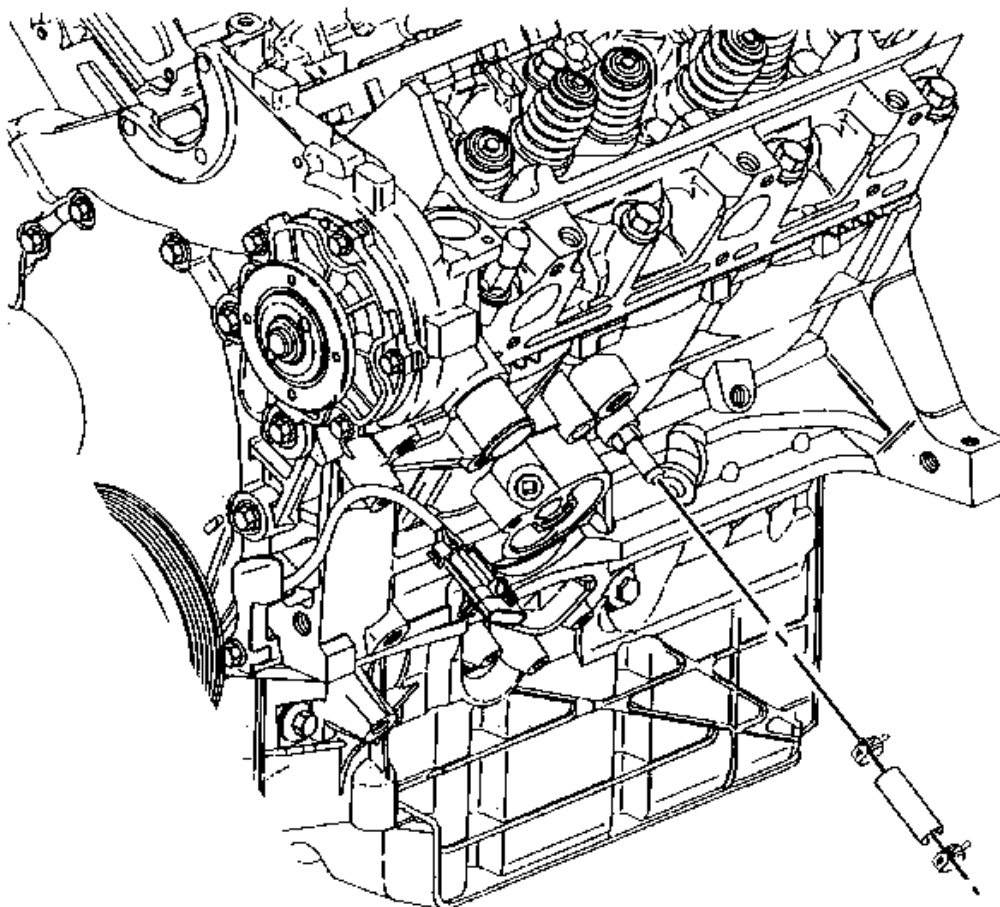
View Of Oil Cooler Inlet Hose Clamp & Oil Cooler Inlet Hose
